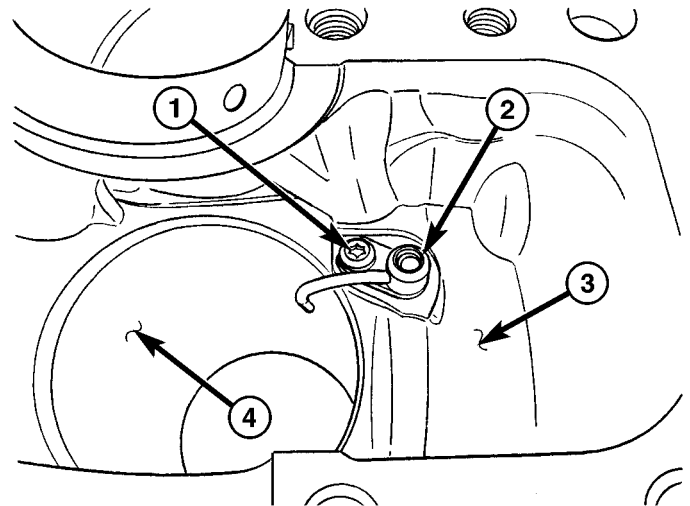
Oil Jet Fastener - 2.4L Turbo
